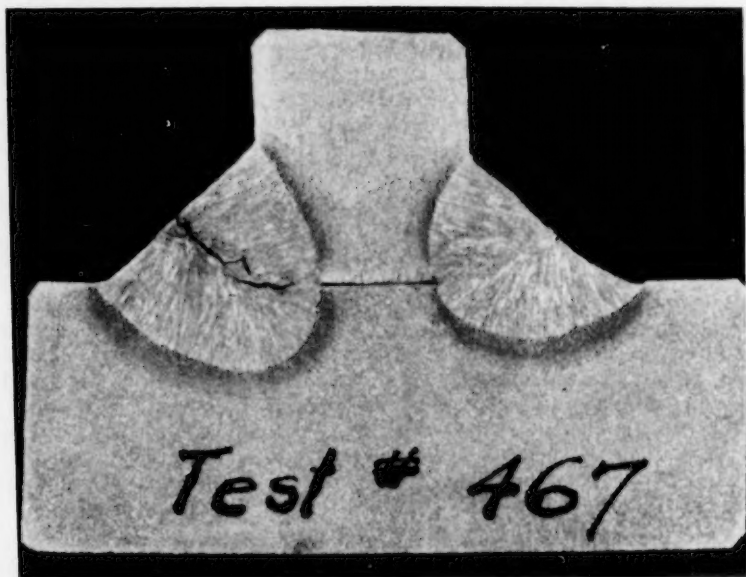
Cracking of this type is also associated with submerged arc welding and is often caused by excessive voltage.
